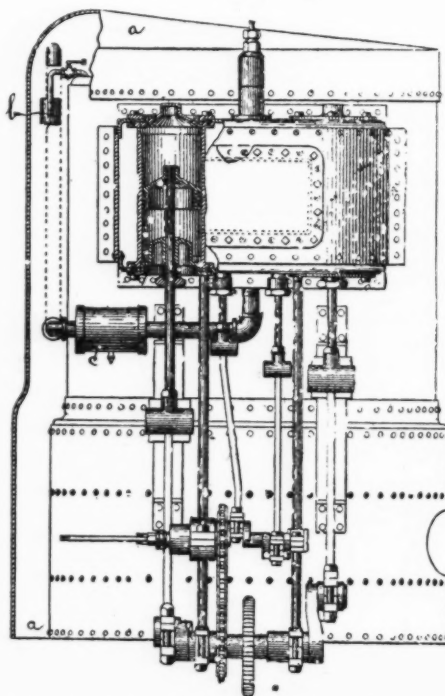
Cross-sectional view of steam engine used in the old Locomobile type of power plant
